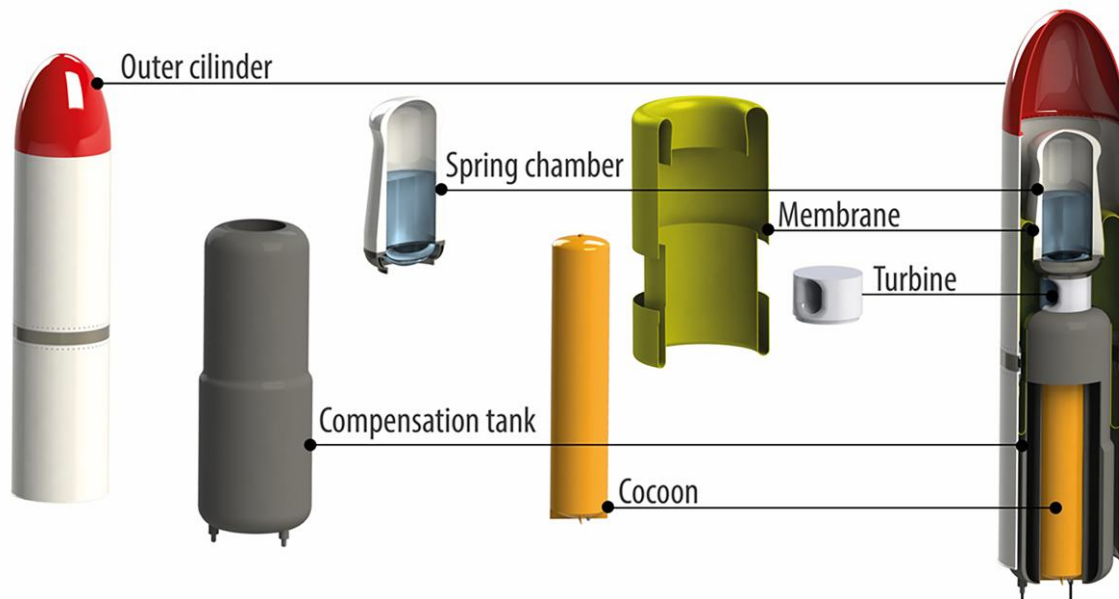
EXPLODED VIEW OF SYMPHONY MAIN COMPONENTS AND THEIR LOCATION: CROSS-SECTION OF INNER AND OUTER CYLINDER, TURBINE, UPPER AND LOWER MEMBRANES, SPRING CHAMBER PROVIDING THE SHAPED INNER HULL FOR UPPER MEMBRANE, COMPENSATION TANK, COCOON AND OUTER CYLINDER (FLOATER).
